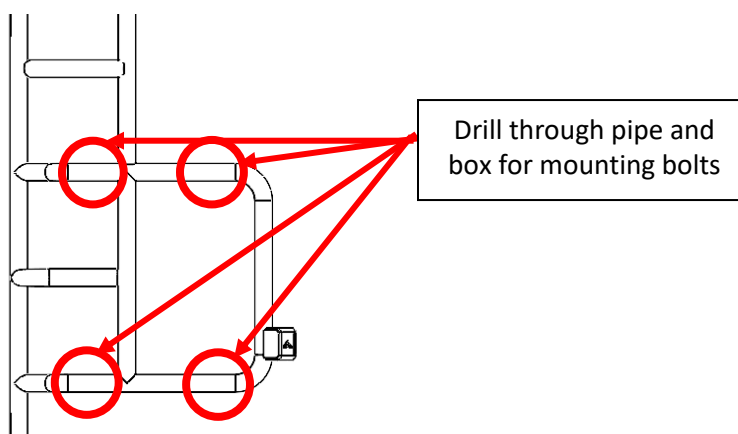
Drill and bolt locations for mounting box on ladder/tire rack
